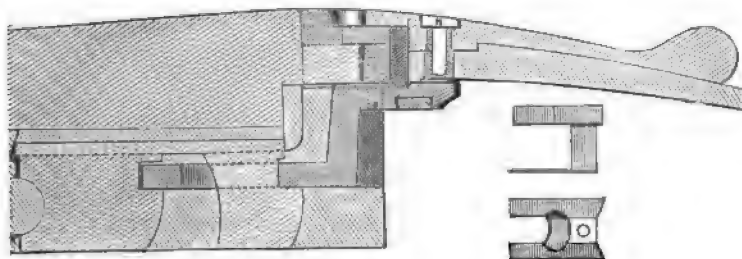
WEBLEY'S COMBINATION BOLT (No. 6). FIG. 2.—PLAN AND SECTION OF TOP BOLT.
